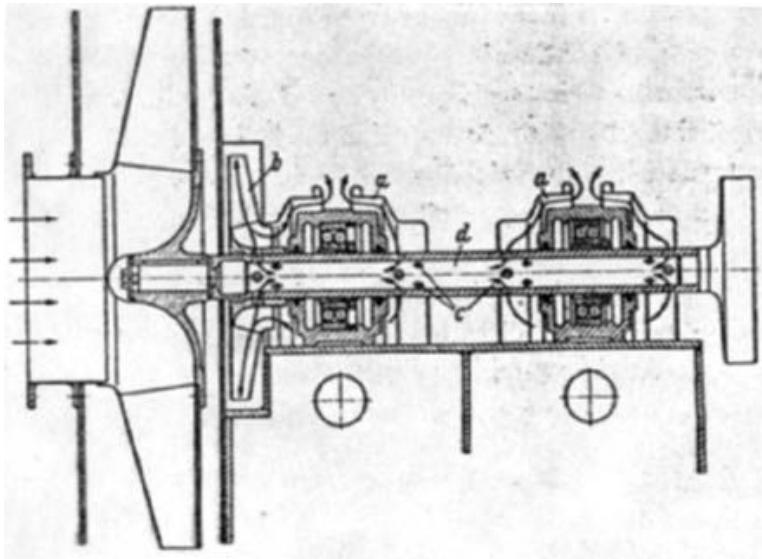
Air-cooled bearings for fan handling hot gases (Mabag, Sulzbach) a, bearing covers; b, cooling impeller; c, openings in a hollow shaft for sucking air for cooling purposes; d, hollow shaft.
